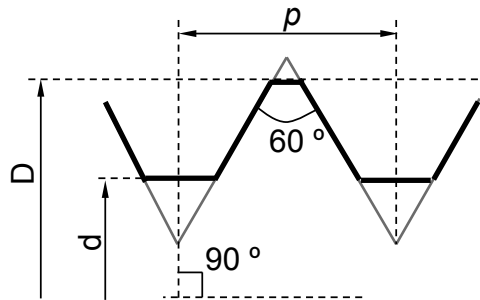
scheme of the thread. The parameters used in the thread sizing.
